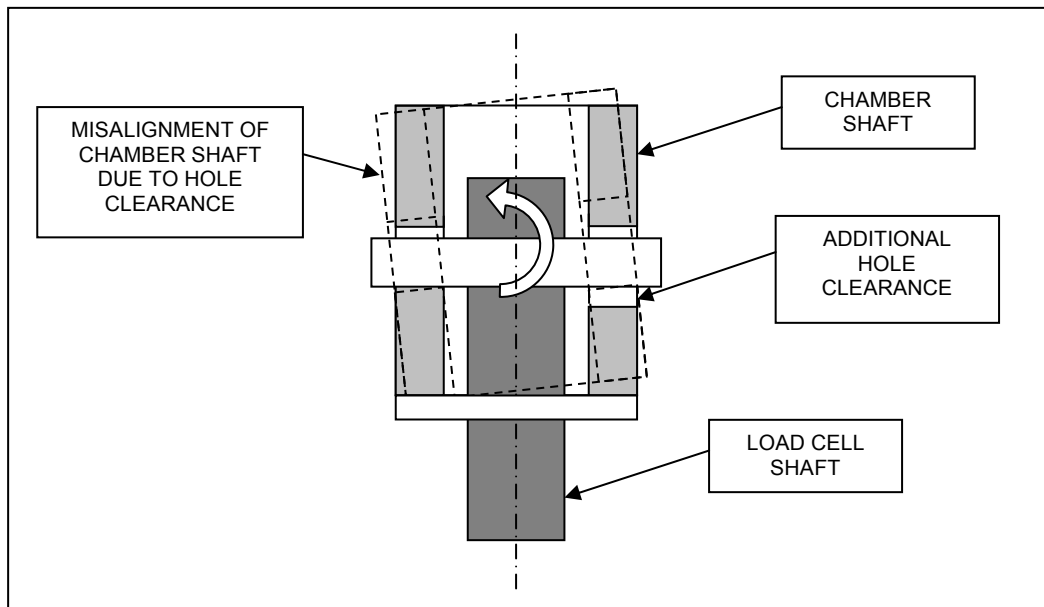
Misalignment of chamber shaft due to asymmetric hole clearance
